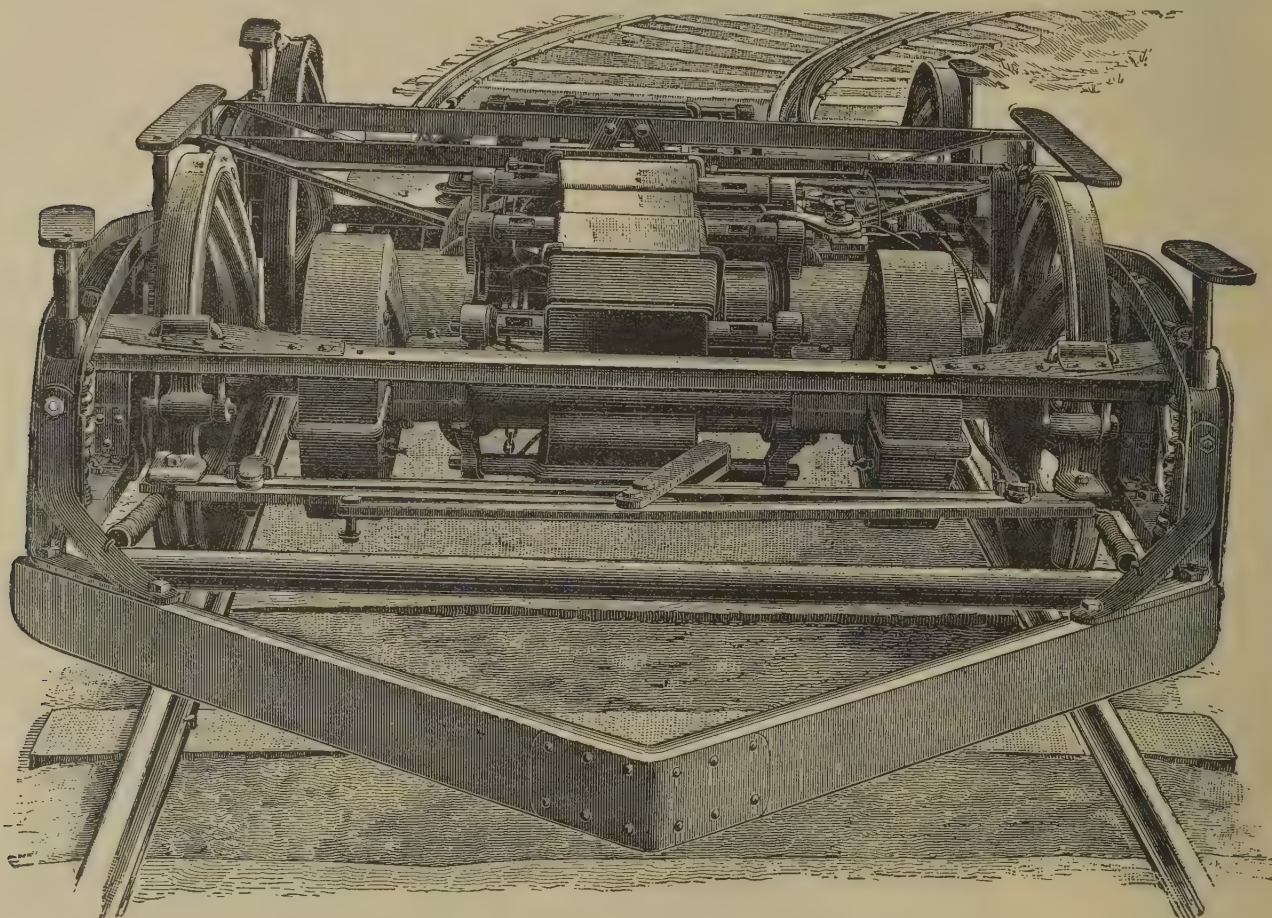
TRUCK EQUIPPED WITH BAXTER MOTOR.
